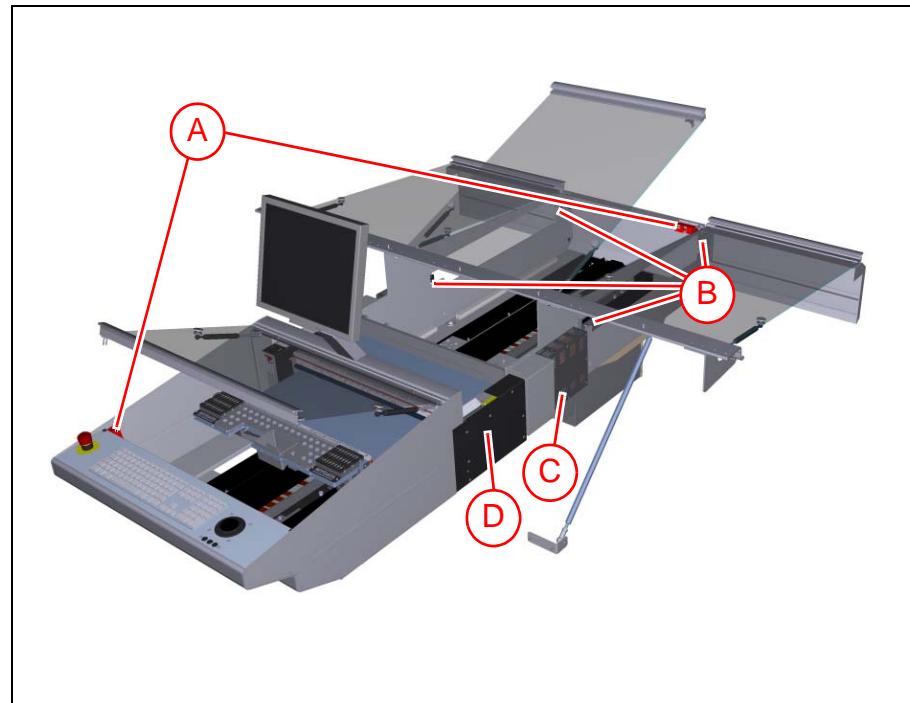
Cover Hoods (The figure shows an example of the T4 conveyor).
